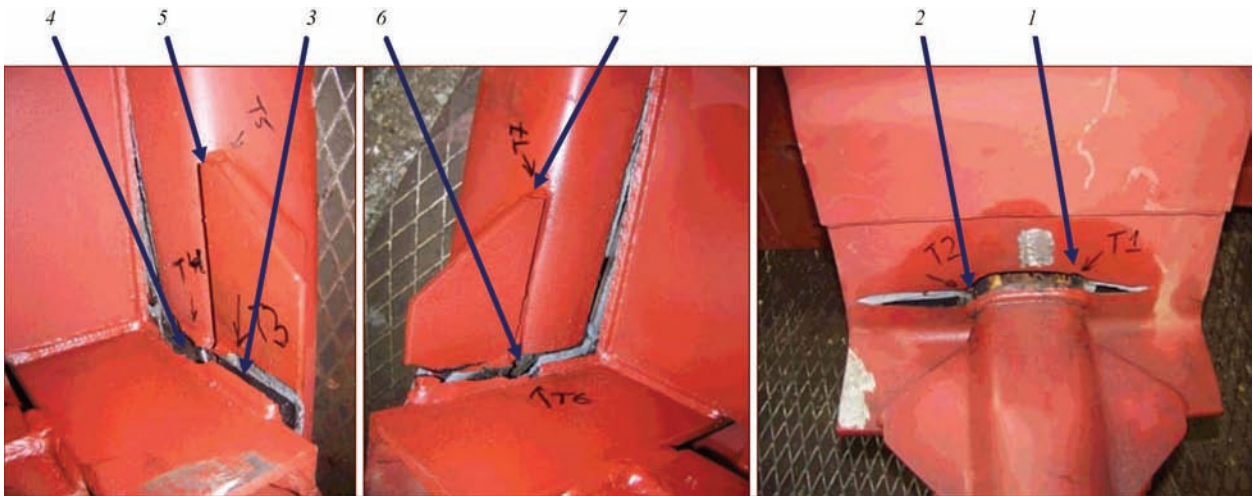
Cracks in the side wall rack sealing assembly (sample No.4): 1, 2 — in the joint of the cross-beam (coverplate over the upper flange) and the lower chord (cracks T1 and T2, respectively); 3 — in the joint of reinforcing angle bar of side wall rack and the lower chord (crack T3); 4, 6 — in the joint of side wall rack and lower chord (cracks T4 and T6, respectively); 5, 7 — on top of the reinforcing angle bar of side wall rack (cracks T5 and T7, respectively)
